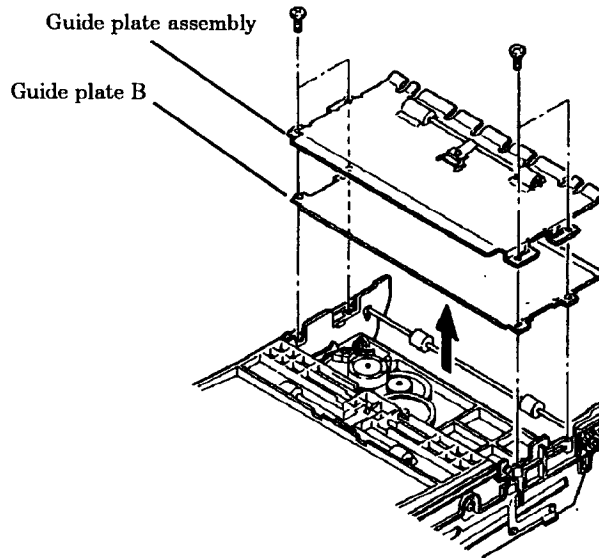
REMOVING THE PASSAGE ASSEMBLY
